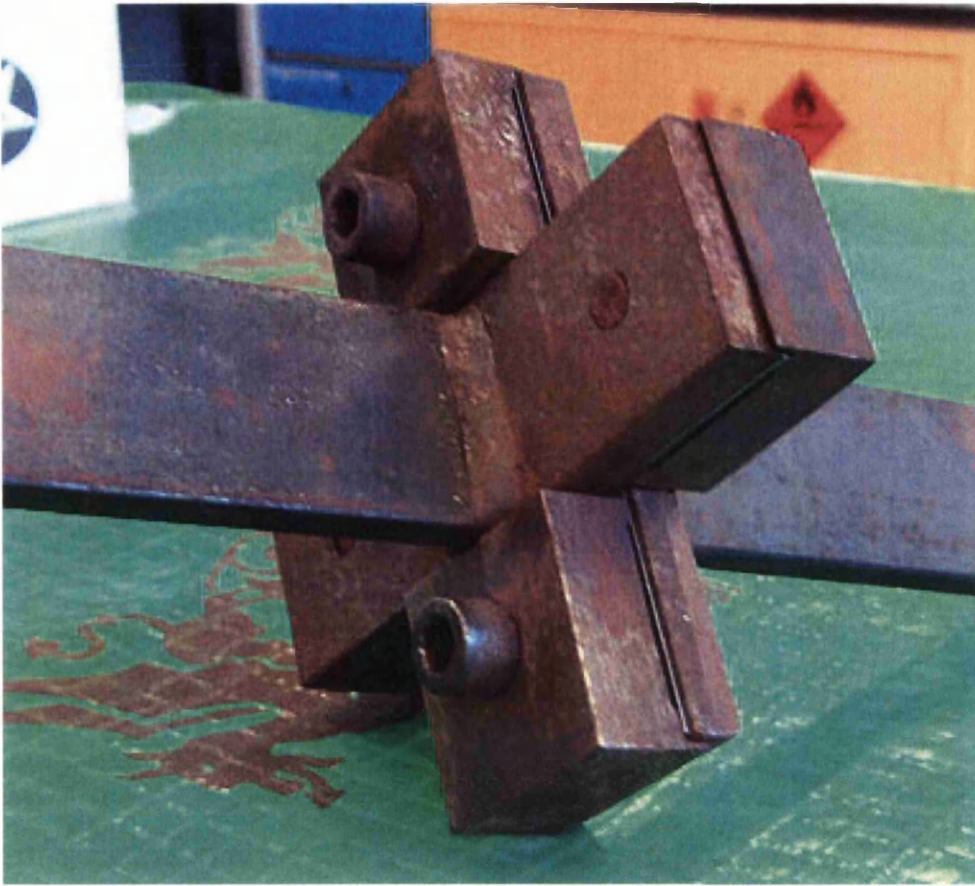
Photograph of cross tension sample mounted in tensile testing jig
